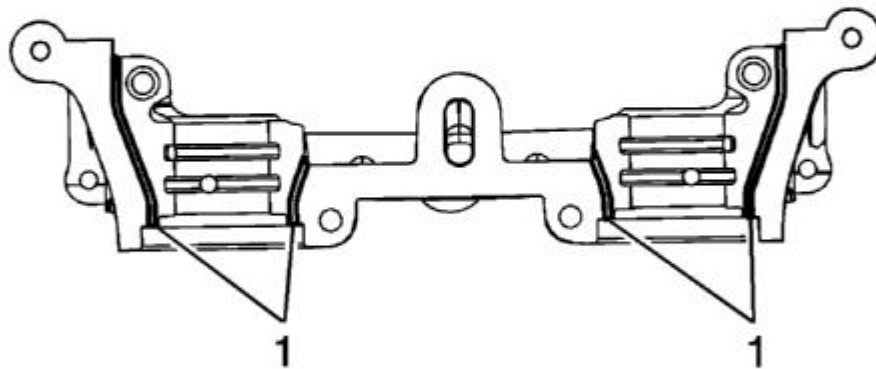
Sealing Surfaces Of Camshaft Bearing Cap
